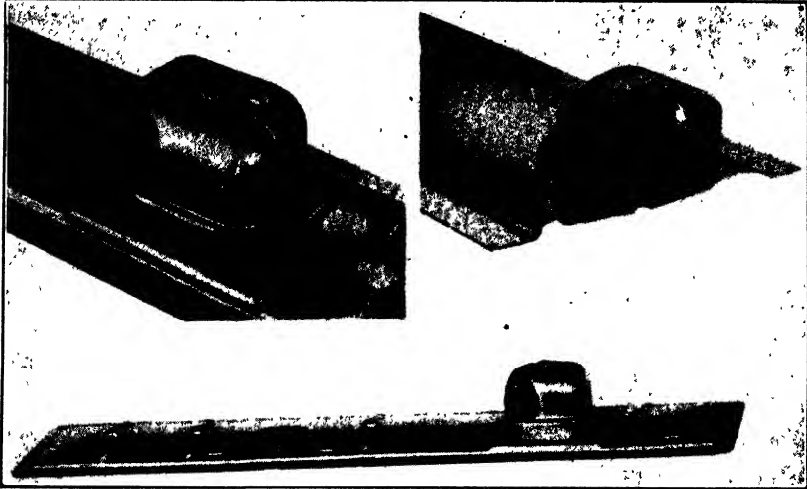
Three views of a copper-brazed push rod cover for an automobile engine.
